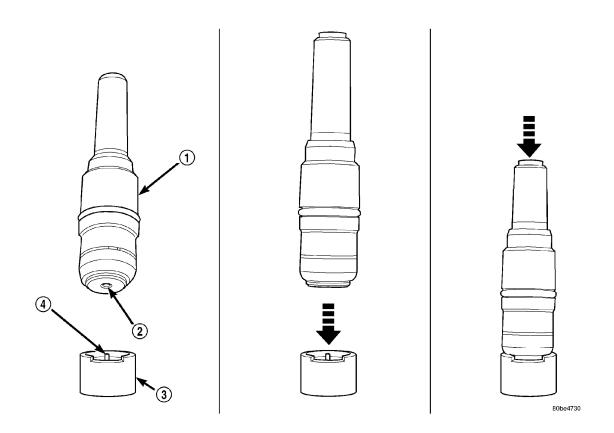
View Of Timing Chain Tensioner - Oil Purging Courtesy of CHRYSLER LLC
